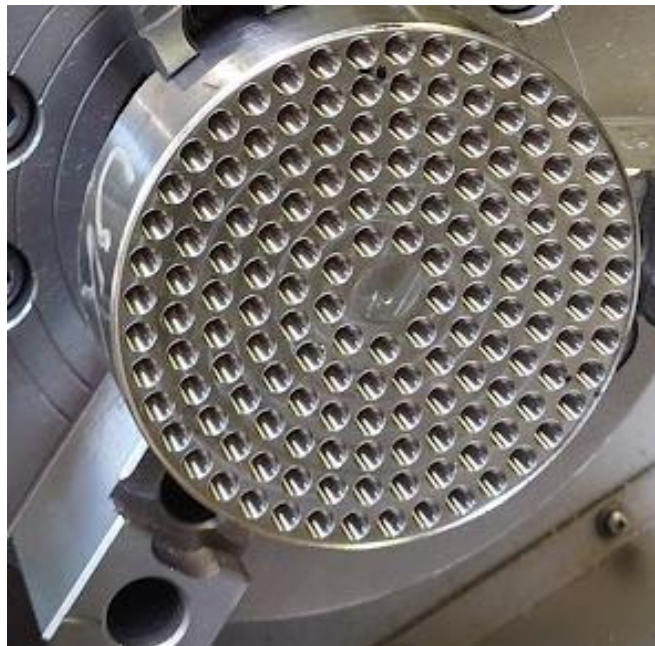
The co-opted workpiece to be used in Balancing Module tests.
